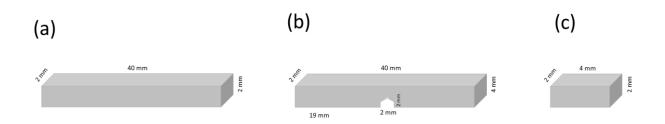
Specimen geometries (a) for the 3-point bending test and fatigue test, (b) for the fracture toughness test, and (c) for the porosity, crystallinity, and biocompatibility tests.
